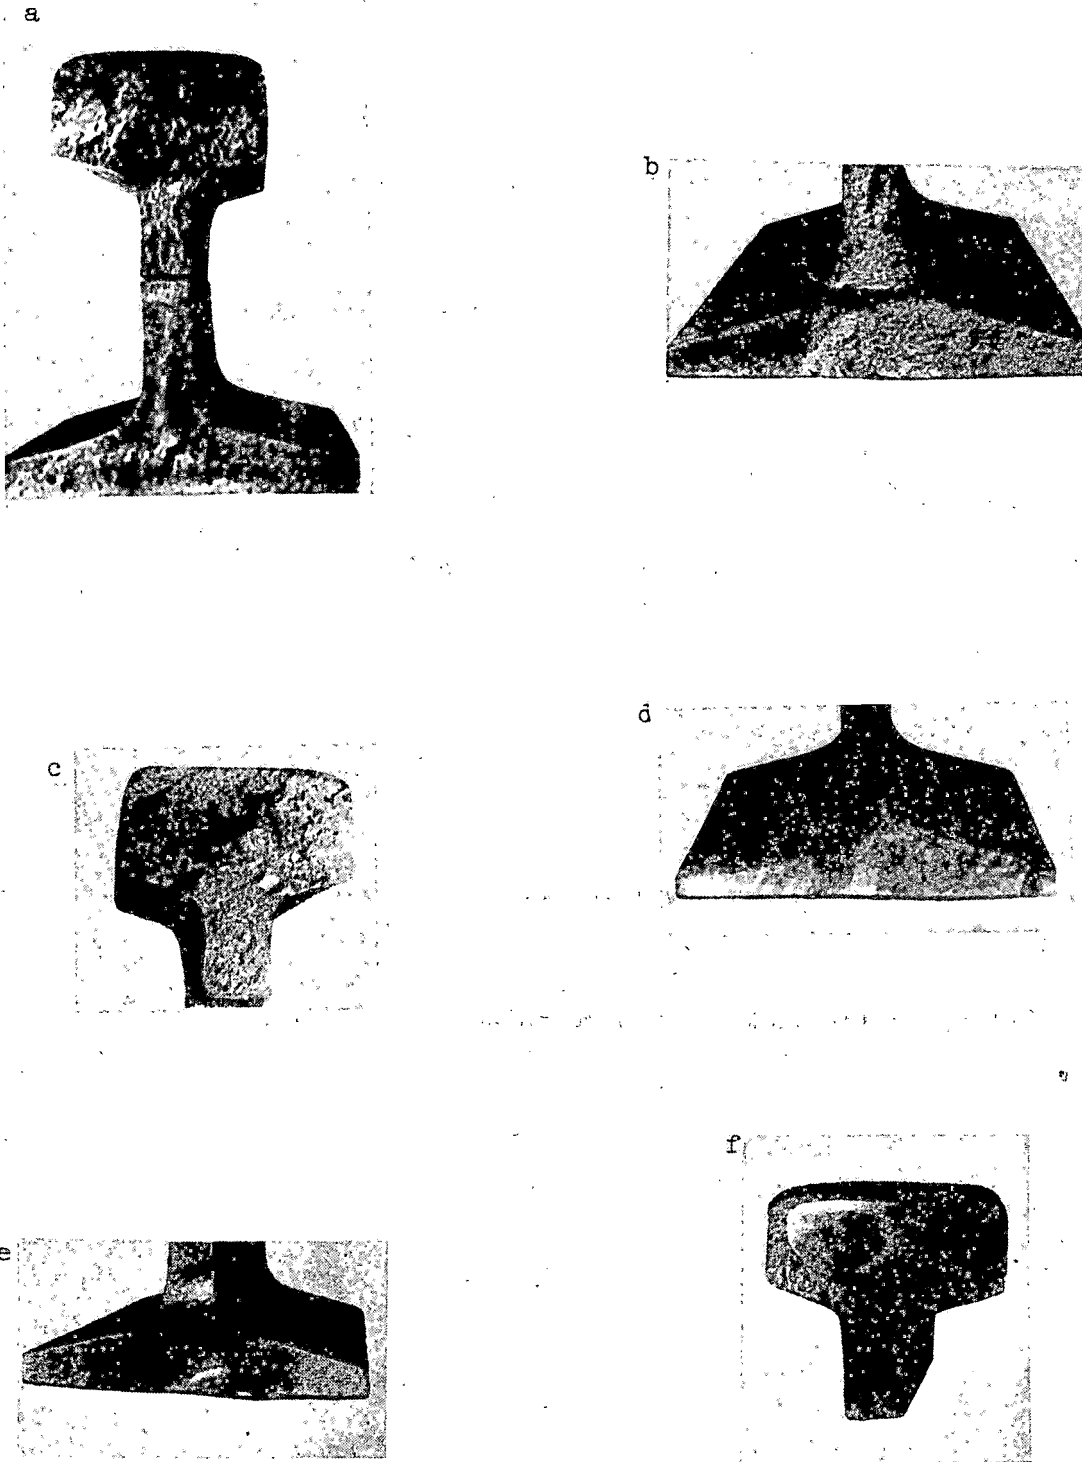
Flaws in welded rail joints detected during ultrasonic inspection
